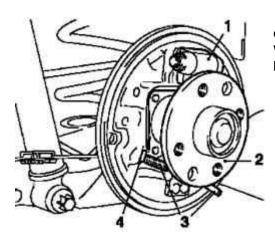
Removing the brake disk: 1 - wheel brake cylinder, 2 - wheel bearing unit, 3 - wire the parking brake system, 4 - Clamp
